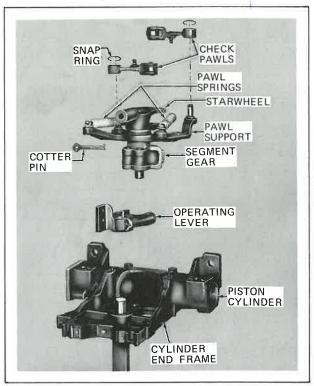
EXPLODED VIEW OF DRIVE MECHANISM PARTS.
